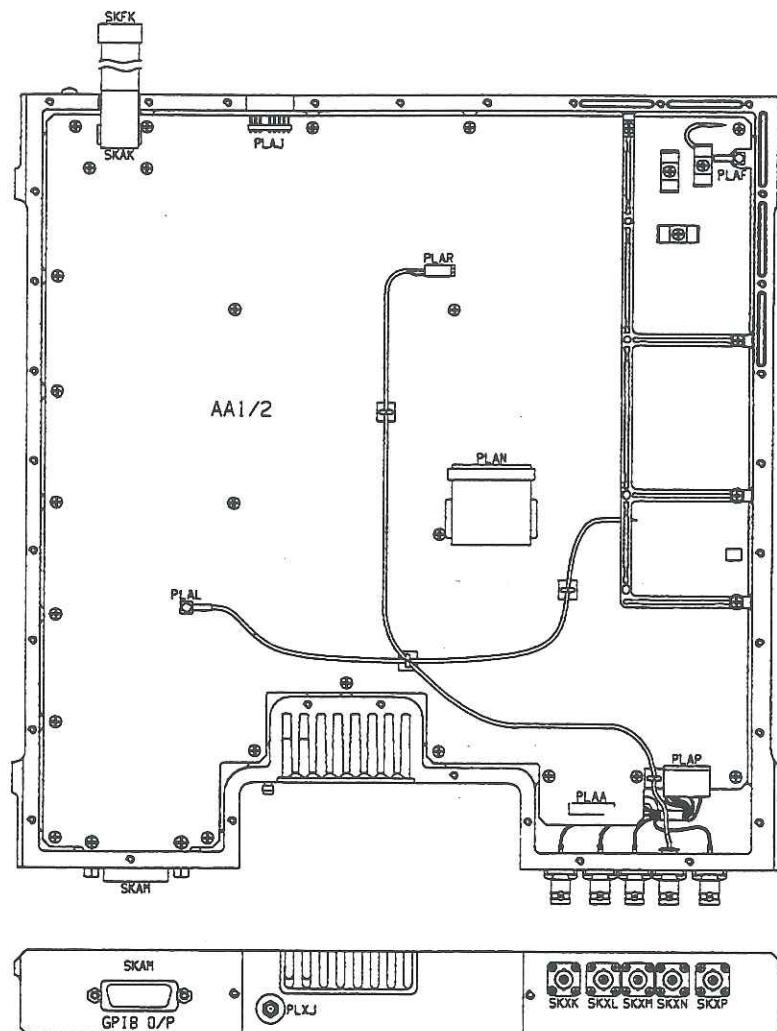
RF tray from above and rear with tray cover removed showing board and locations of connectors
